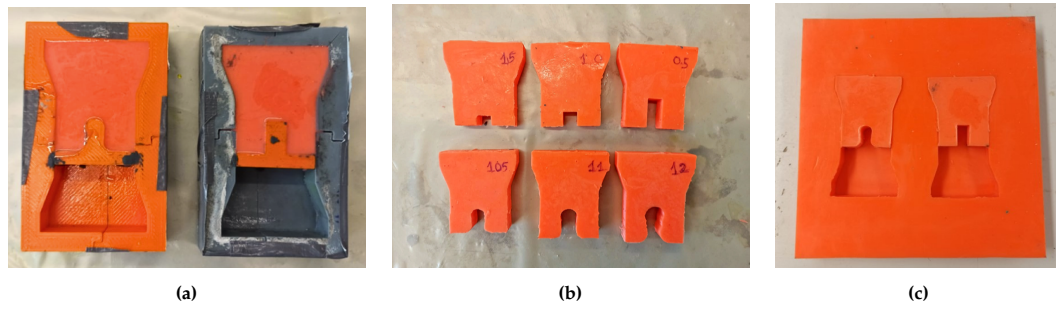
Silicon parts for interface elements: (a) silicon rubber casting (b) hardened silicon interface top parts & (c) mould preparation for SHCC casting
